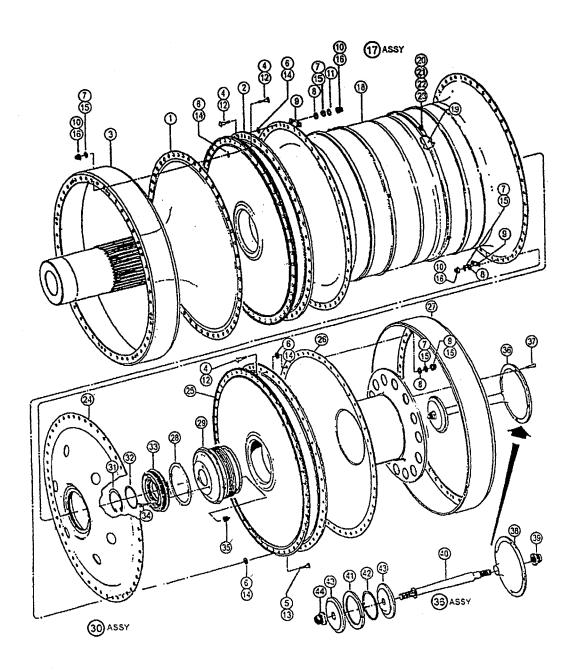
High Speed Coupling Shaft Assembly Breakdown
